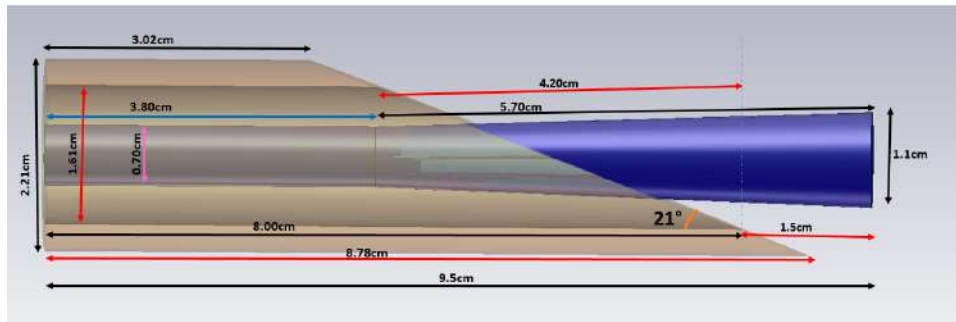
The fabricated dimensions of the trimmed air-filled coaxial transition
